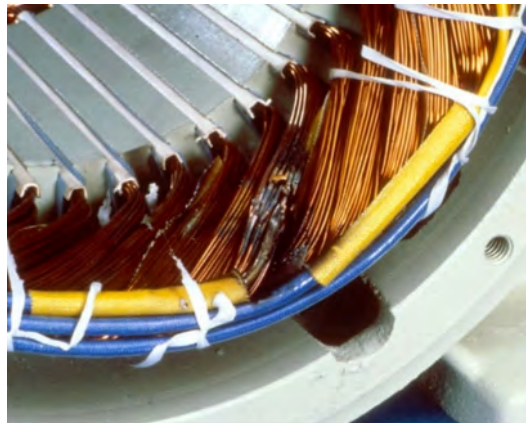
Failure in a three-phase stator winding of an electrical motor
